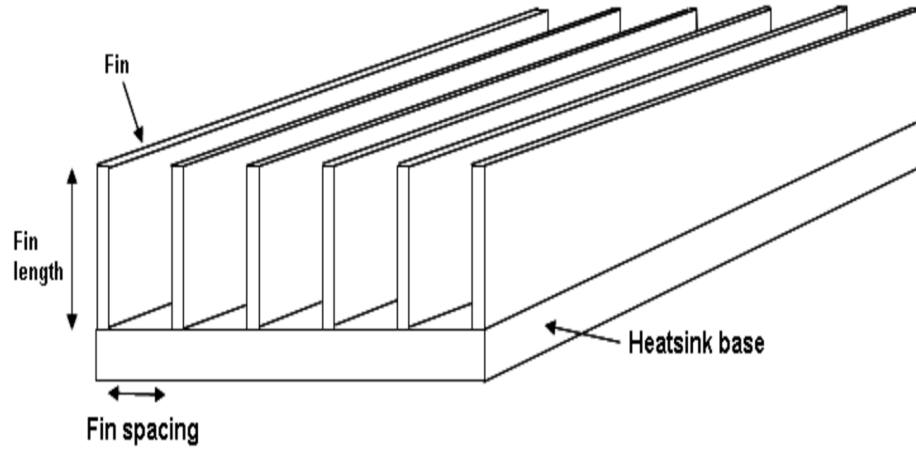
Schematic of Plate fin heatsink with labeled part [41].
